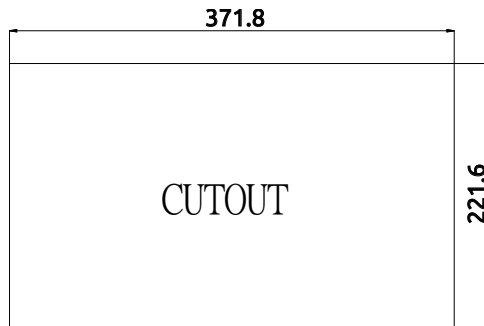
PKX-SP2-KL-15 Cutout Dimensions
